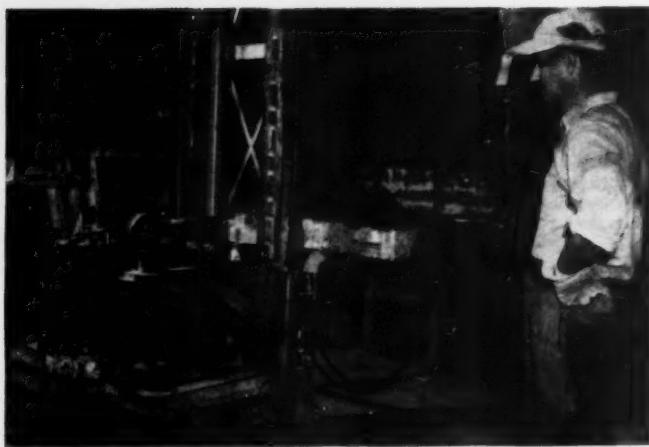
Holding cylinder is capped and air pressure is applied, shooting metal into the mold.
